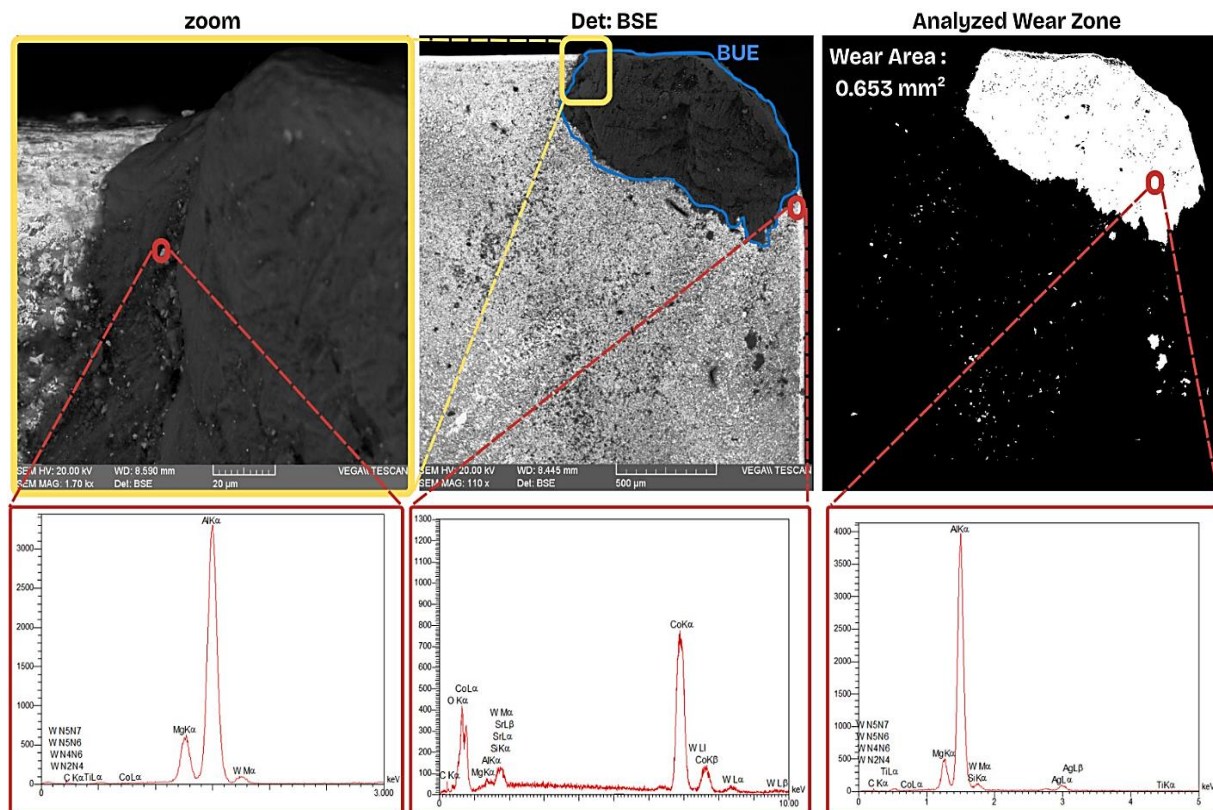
Tool wear mechanism under machining conditions: L = wet, $f = 0.2$ mm/rev, $d = 1$ mm, $N = 1000$ rpm.
